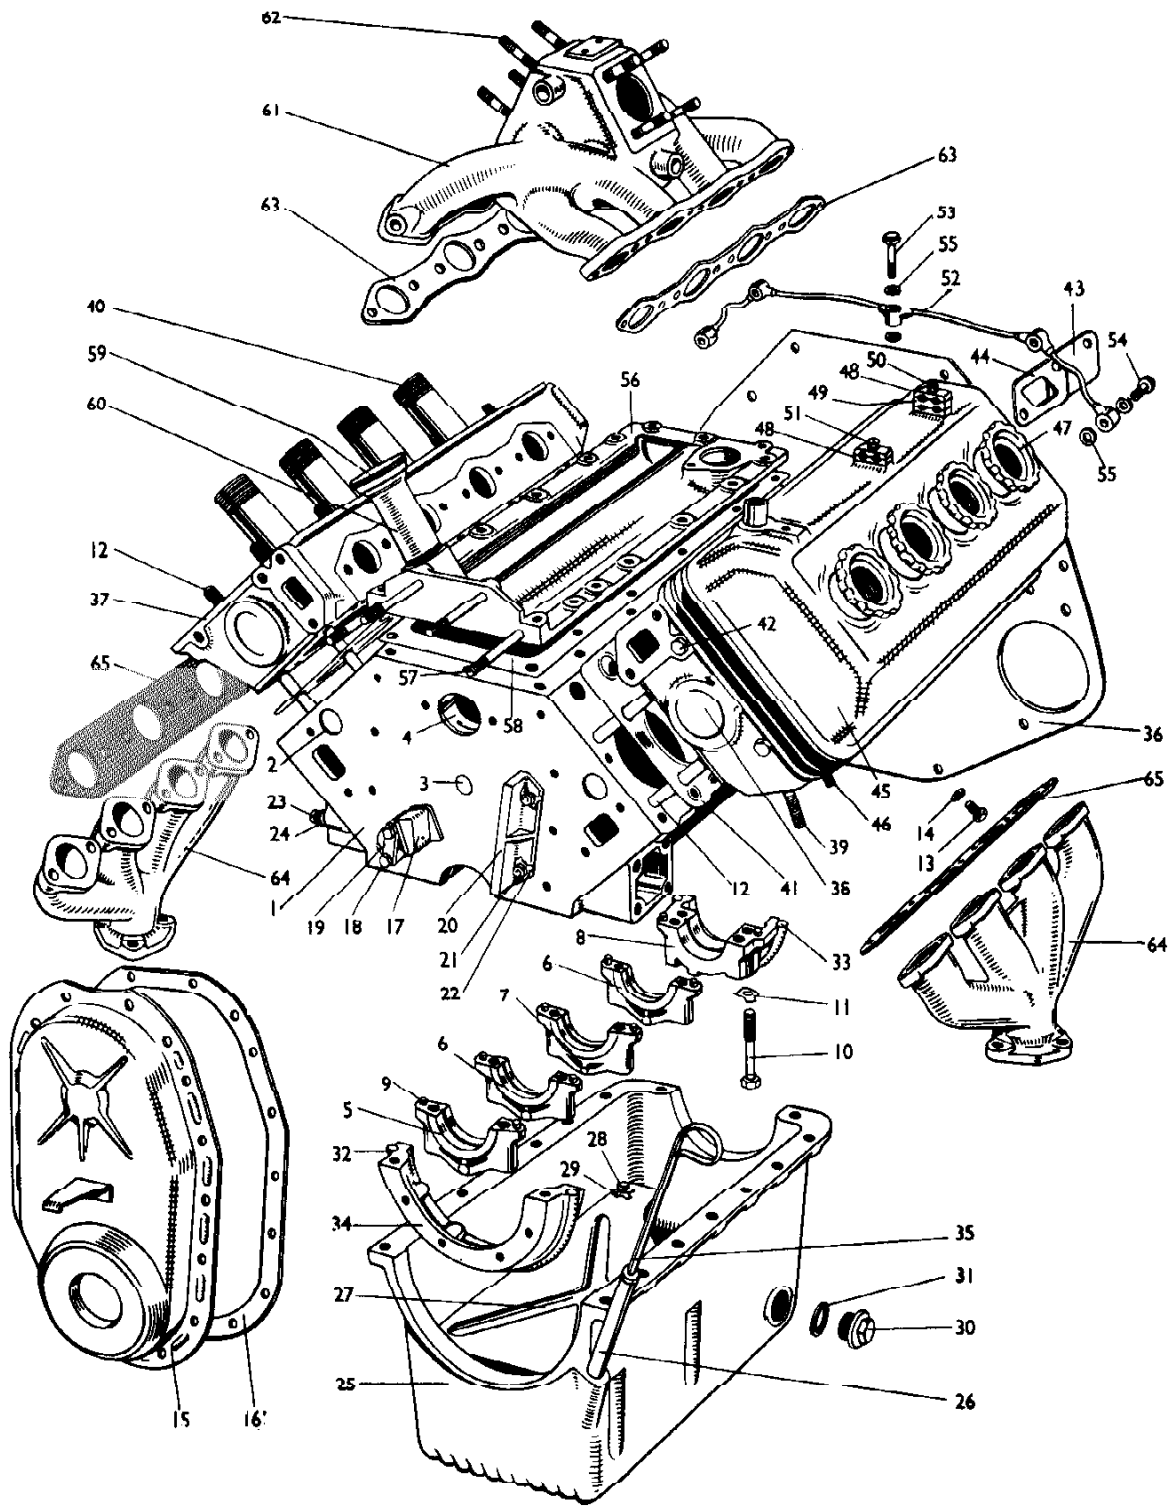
Exploded View of Engine Unit (Non Moving Components)
